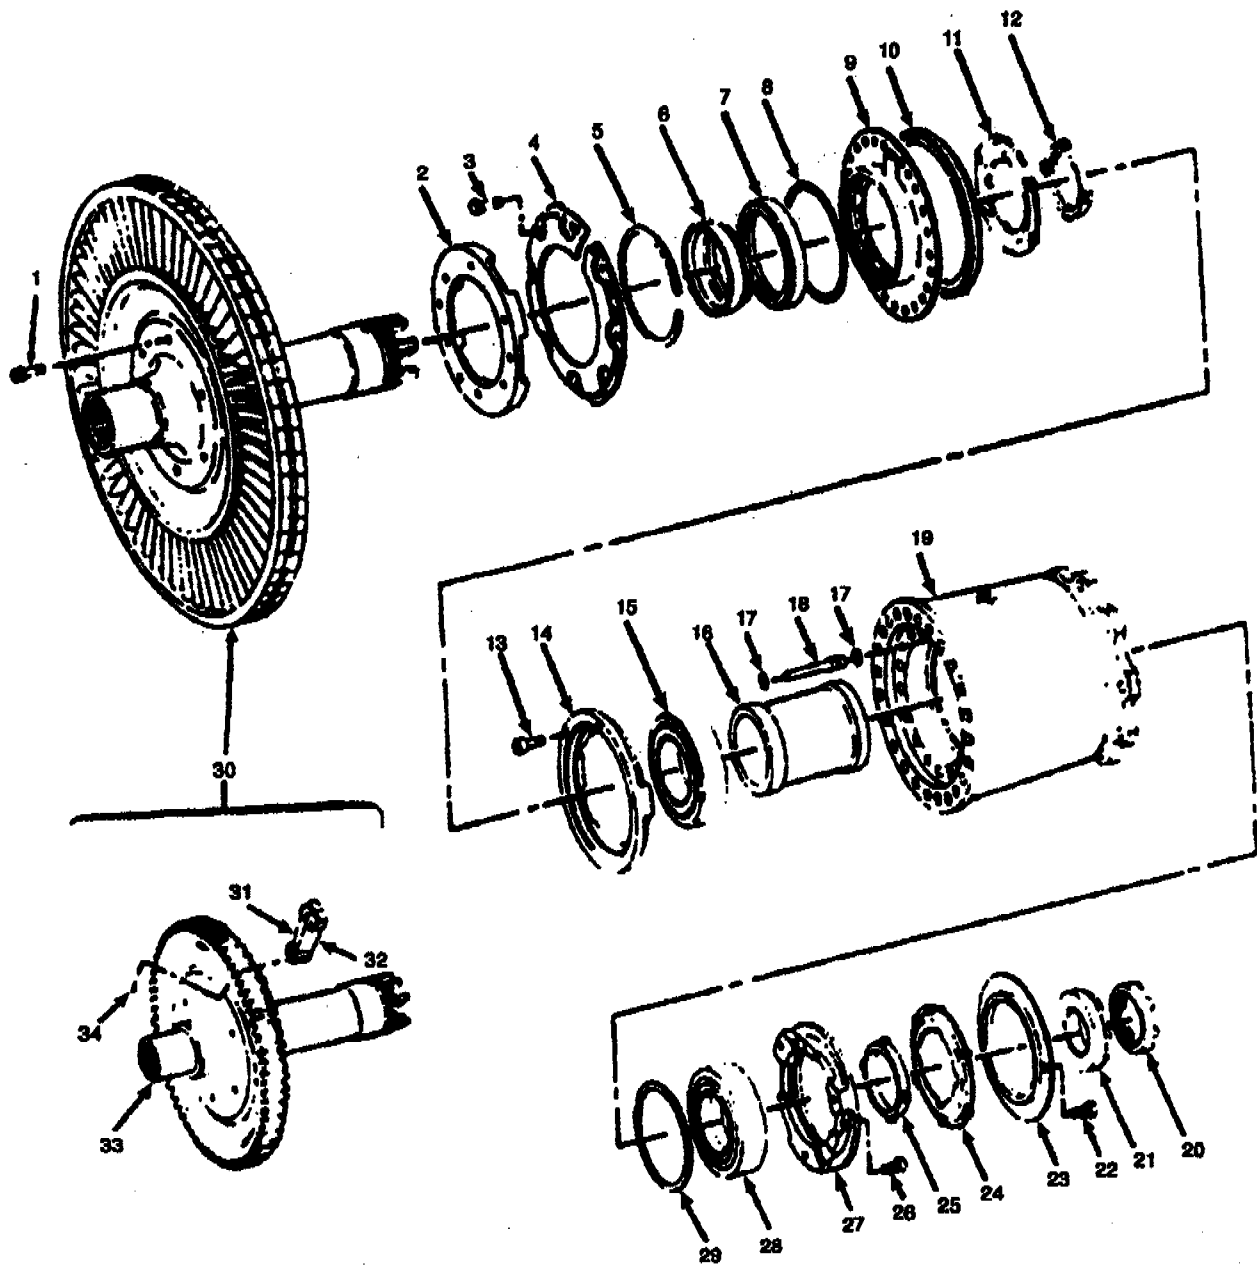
Power Turbine Rotor and Bearing Housing Assembly.
